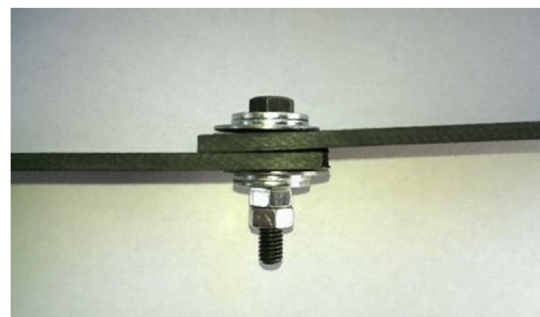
Side view of the specimen after bearing test. Lock nut was used to avoid loosening of the bolt connection.
